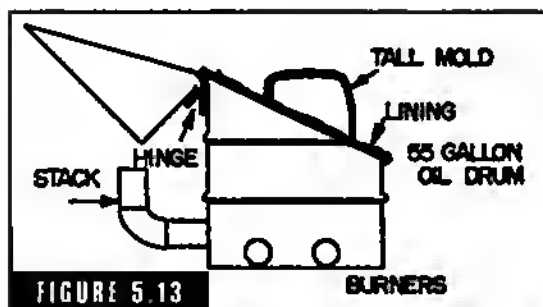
A stacked kiln, built around a mold to be filled at the site of its construction.
